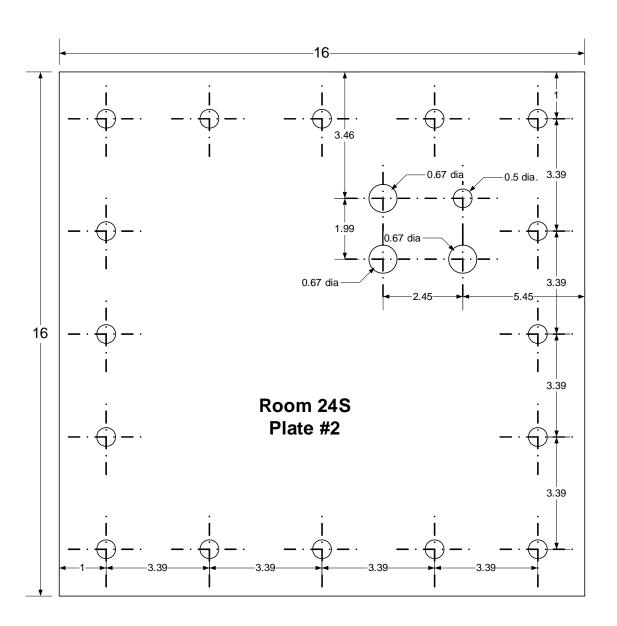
Room 24S (Test Room) Outer Mounting Plate (View from outside chamber) Plate #2
